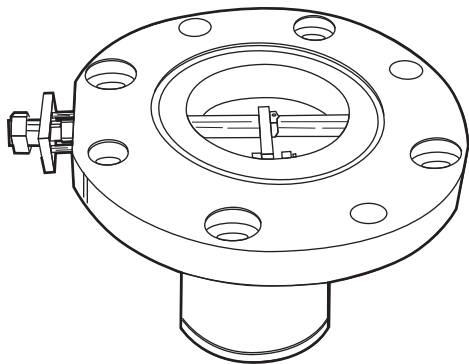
Suction Service Valve Locking Device, Closed and Unlocked (Flooded Cooler Units)
